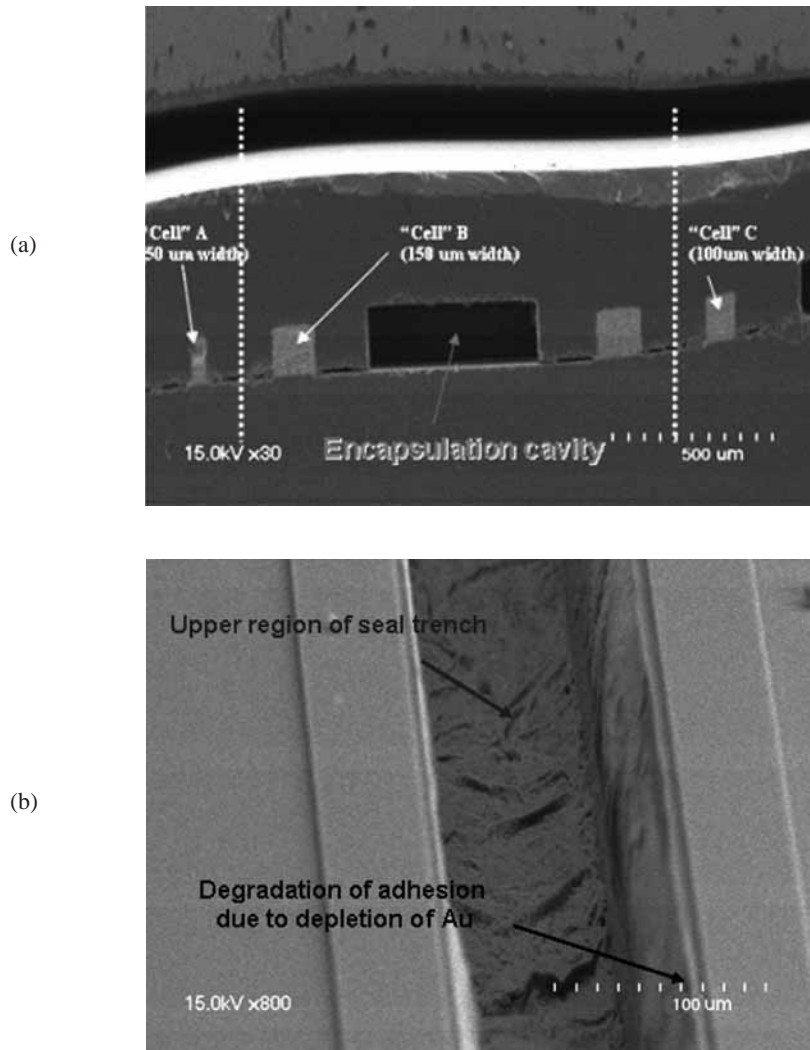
SEM photographs of (a) cross-sectional view of bonded cell and (b) tilting view of fractured surface.
